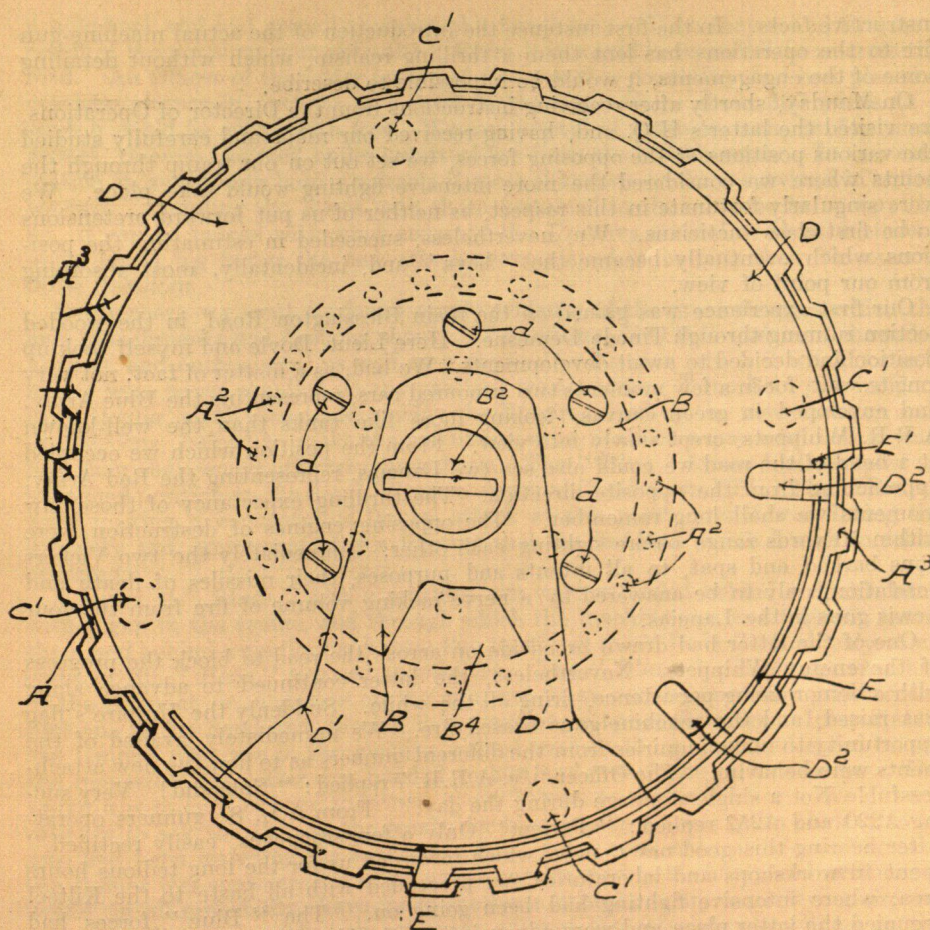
Top view of complete magazine, showing cover plate with opening D.D., through which the cartridges are passed to feed arm. C position of platform springs, D screws retaining cover plate; A2 original divisional studs of magazine.
